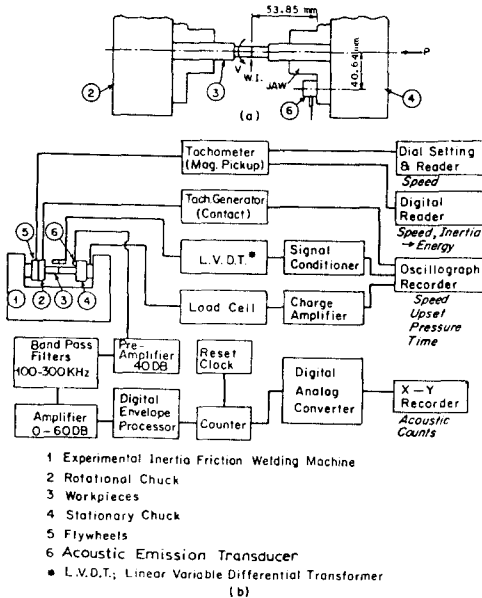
(a) AE transducer location, (b) Block diagram of AE monitoring equipment and welding parameters measuring apparatus.
